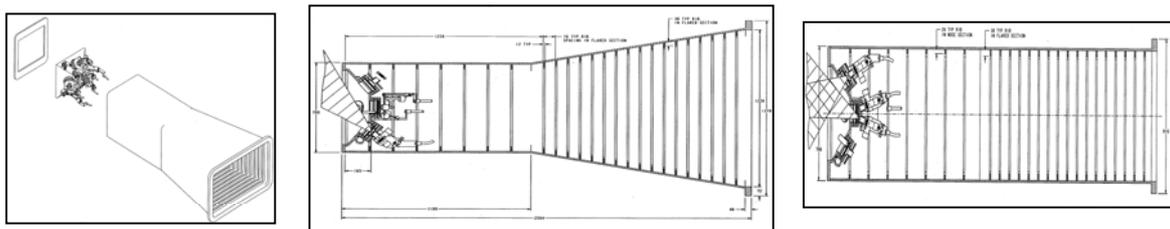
Exploded view(left), and horizontal(center) & vertical section(right) of the bay J cassette showing stiffening ribs.
